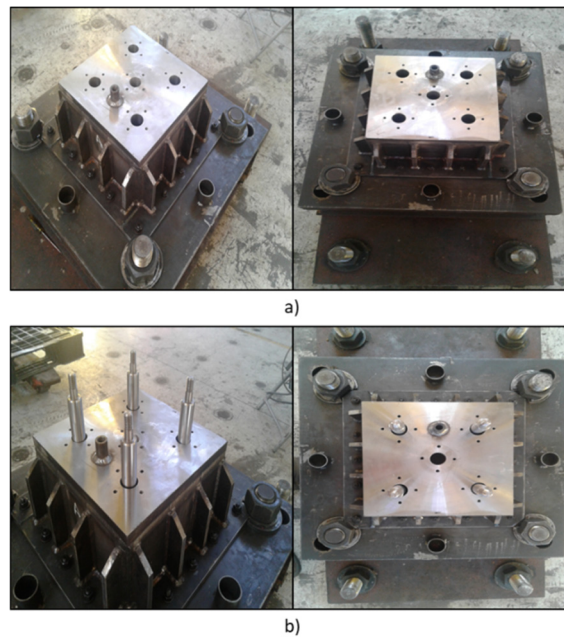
Installation of the box barrel on the bottom mounting; (a) without piston rod, (b) with piston rod.
